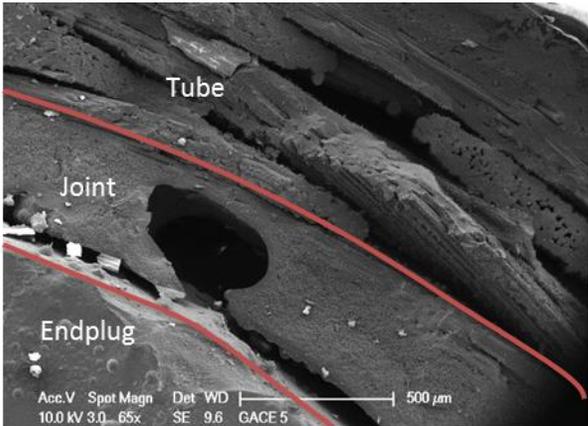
Cross-sectional SEM view of endplug joint for GACE 5 showing void
